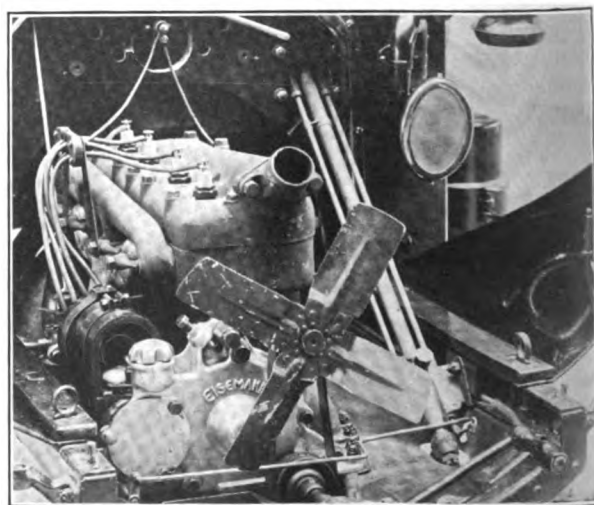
Showing the Eisemann Magneto Attachment for Ford Motors Installed—A Quiet Gear Drive, Well Lubricated, Is Among Its Practical Features.
